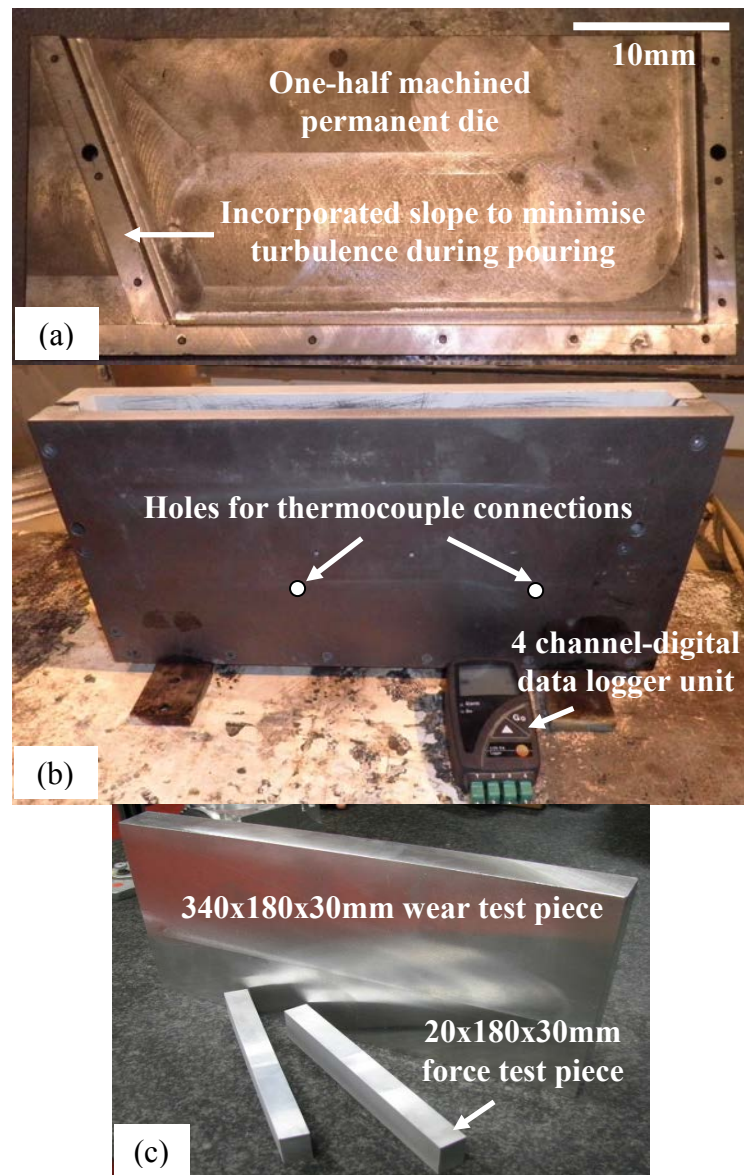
Phase 4 workpiece preparation for (a) permanent cast iron die, (b) die assembly and (c) cast/machined aluminium blocks
